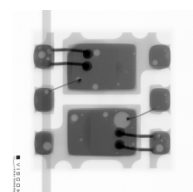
DFN2020-6 (SOT1118) without wettable side pads (2-D294): solder paste printing without fails
